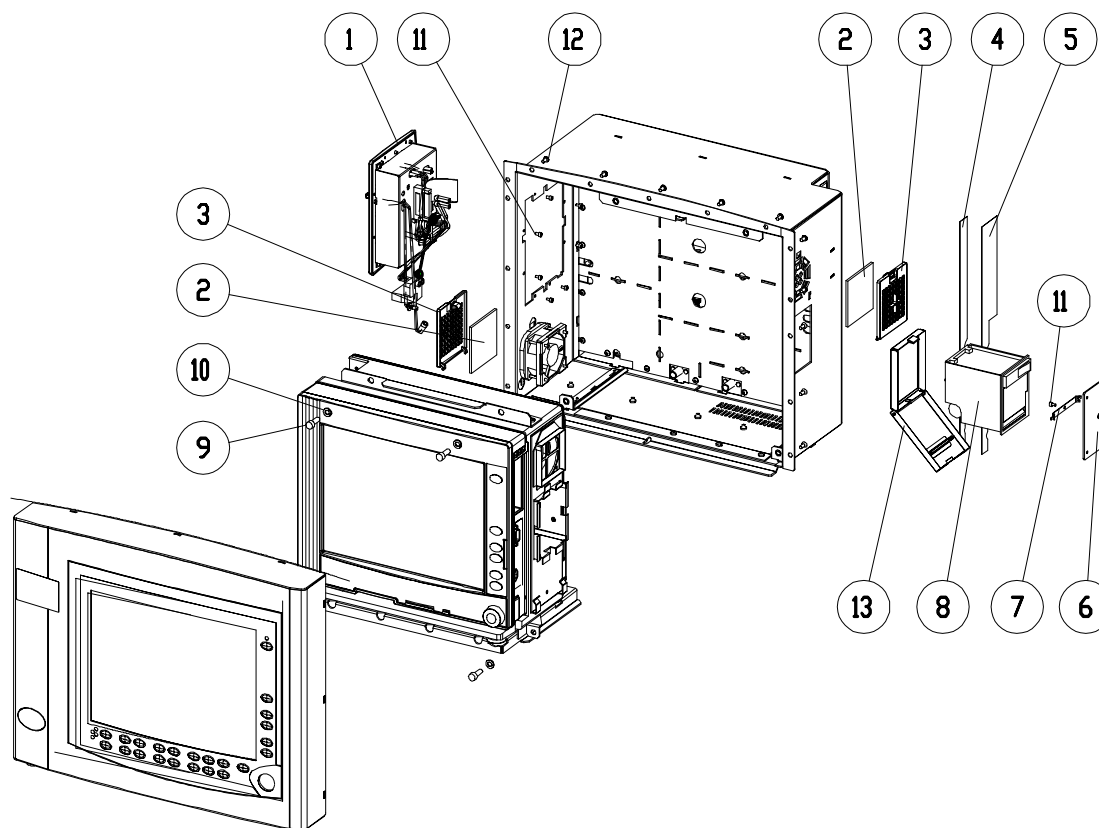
Exploded view of the MRI Shield, Back shell unit and optional parts
